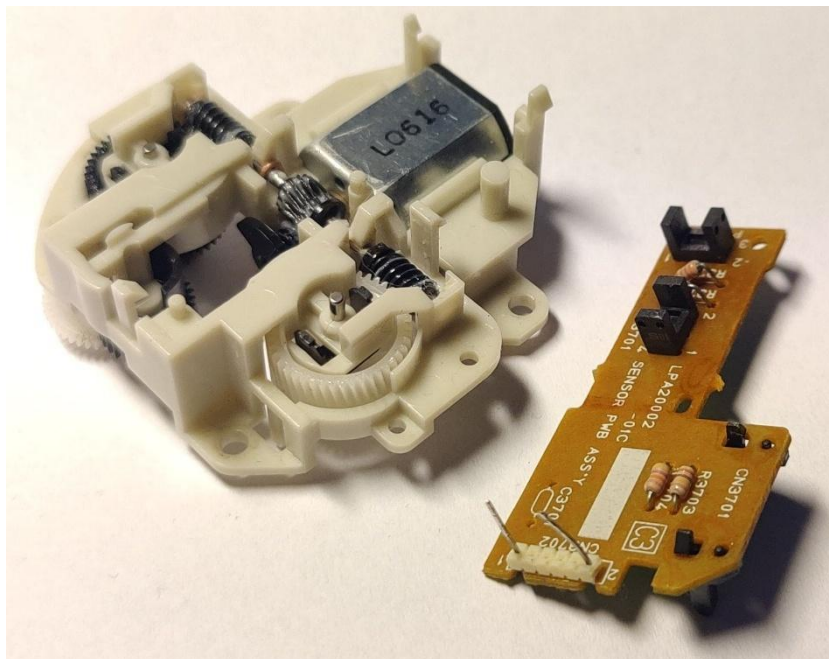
PCB removed. The circuit only contains 4 resistors and 2 photosensors.
